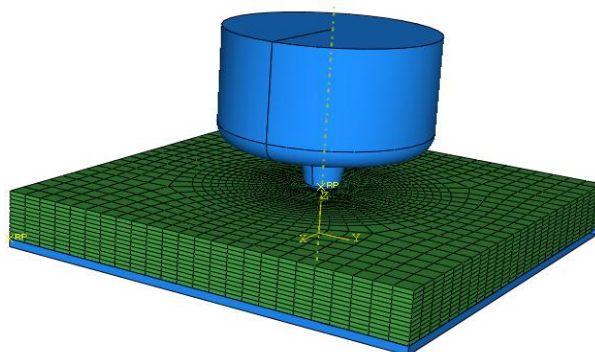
4 Numerical model of welding plate, tool and backing plate
